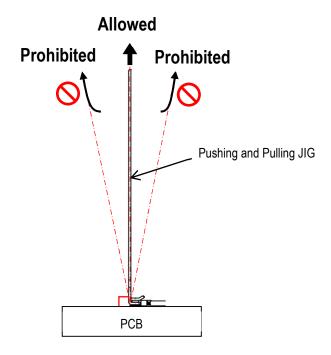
How to lift up the connector by Pushing and Pulling JIG
